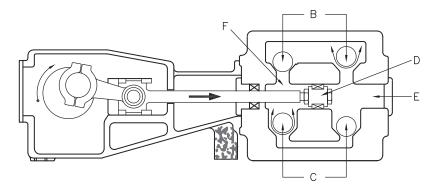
Schematic diagram of a "double-acting" piston pump (B—discharge check valve; C—suction check valve; D—piston; E—discharge pressure; and F—suction pressure).
